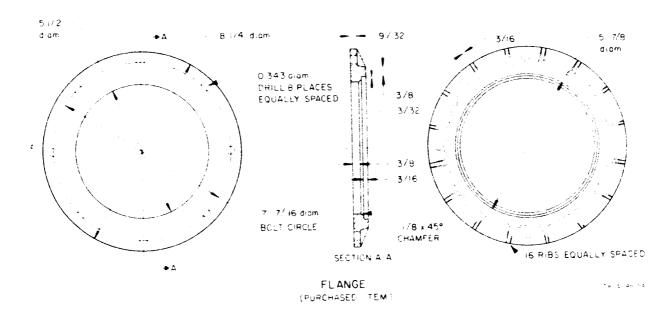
FLANGE DIMENSIONS FOR 8-MONTH STORAGE TEST UNITS
